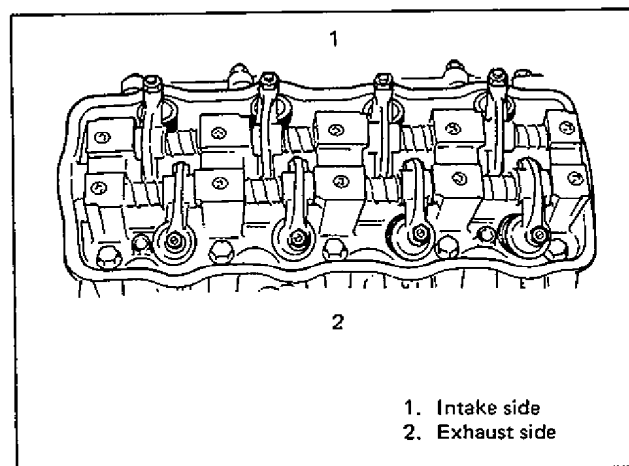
A-75 Rocker Arms, Springs, Rocker Arm Shafts and Screws Installation
